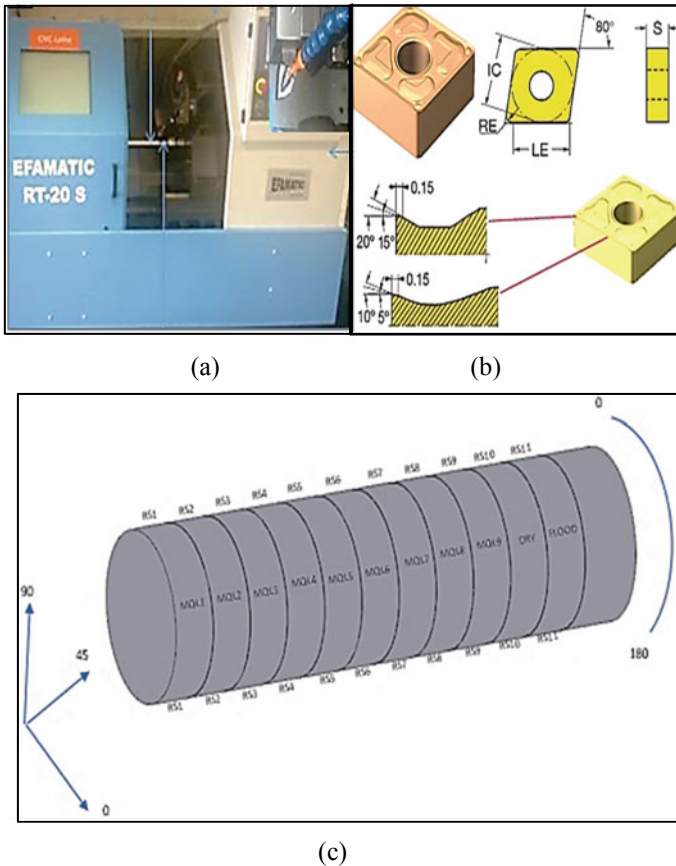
a Experimental setup with MQL and flood cooling nozzle configuration; b cutting insert with chip breaker technology; c machined titanium bar
